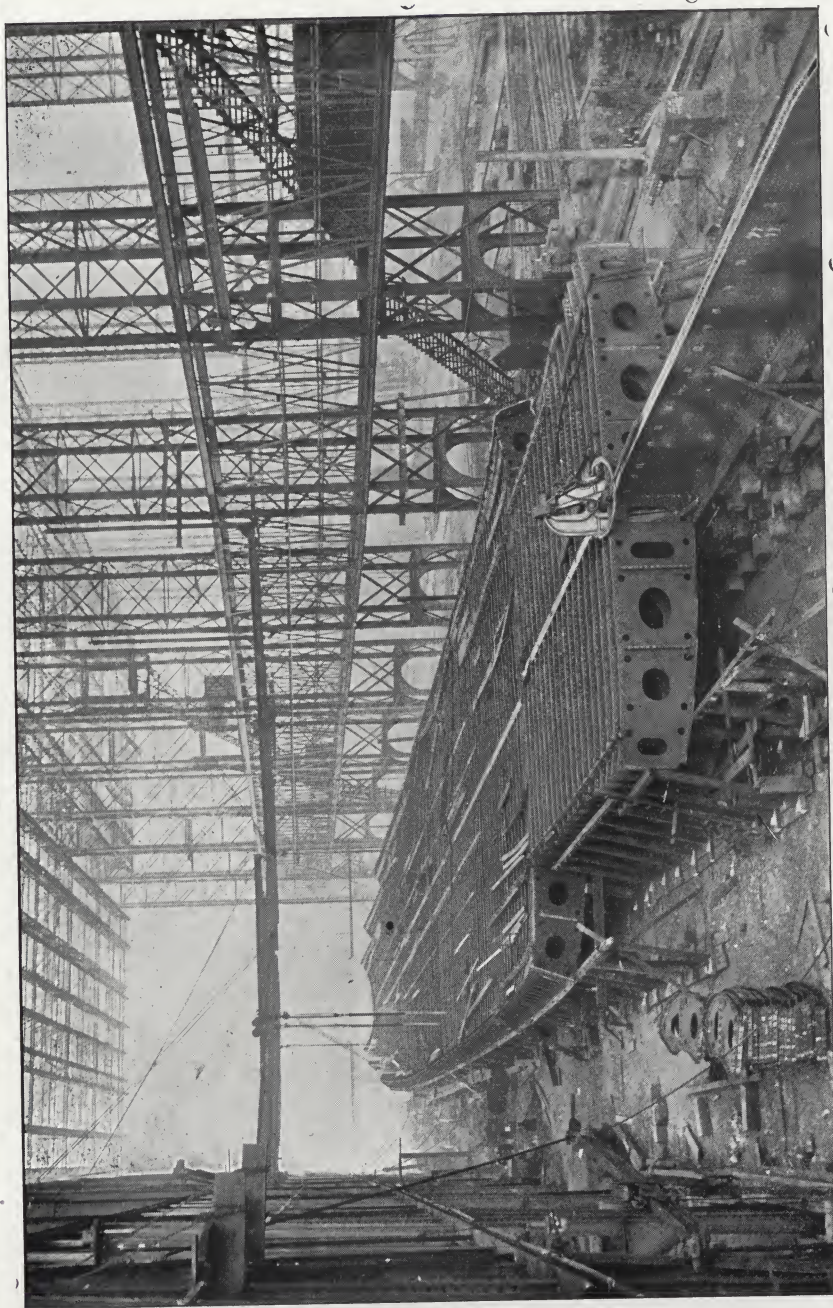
Midship and Forward Parts of Cellular Double Bottom
